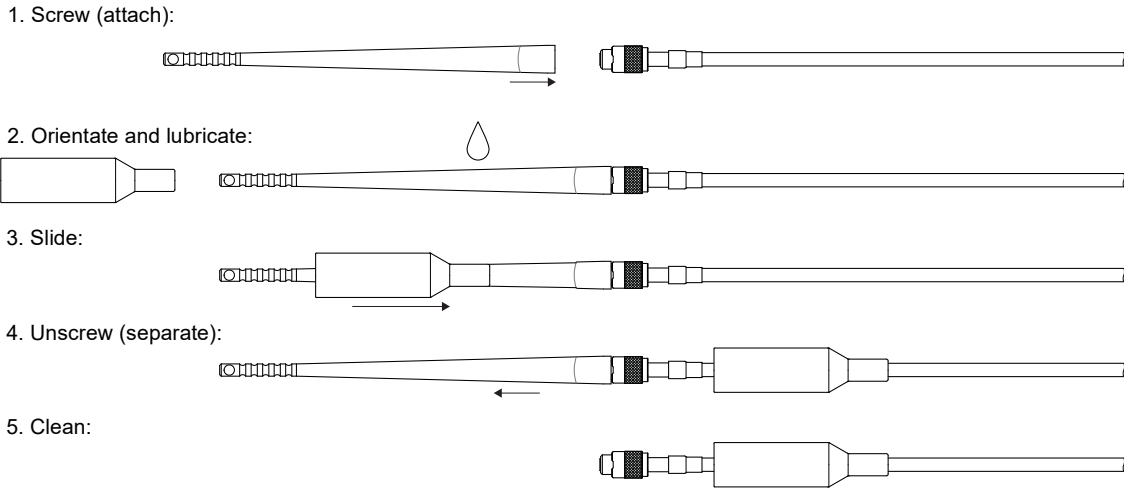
Assembling the female IP172 interconnection protector on an EA90x extension cable
